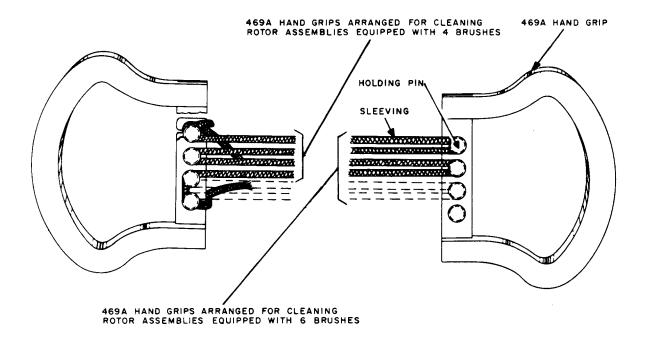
469A Hand Grips Arranged for Cleaning Rotor Assemblies Having 4 or 6 Brushes
